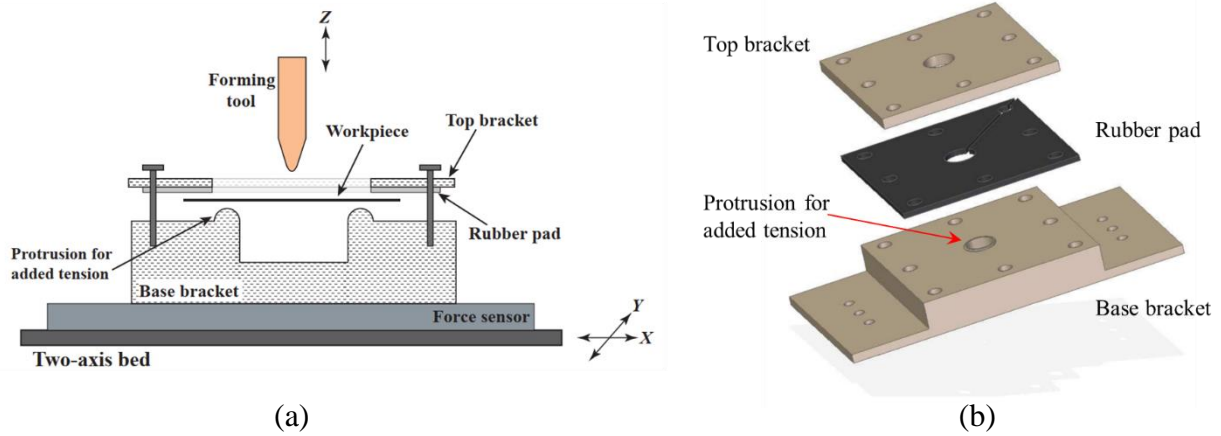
(a) Schematic of the experimental setup designed for incremental micro-forming process including forming tool, specimen fixture and force sensor (b) detailed design of the specimen fixture
